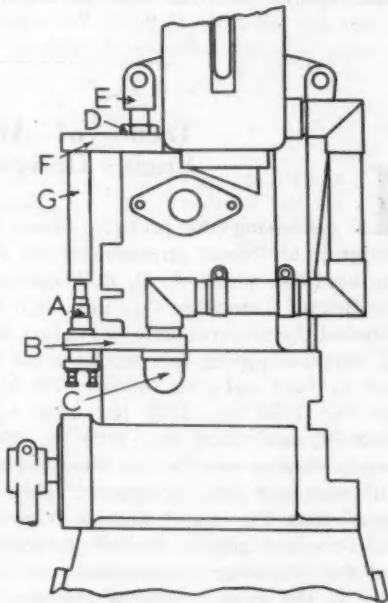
Arrangement of pick-up unit on C. F. R. engine for use with Sunbury Knock indicator
